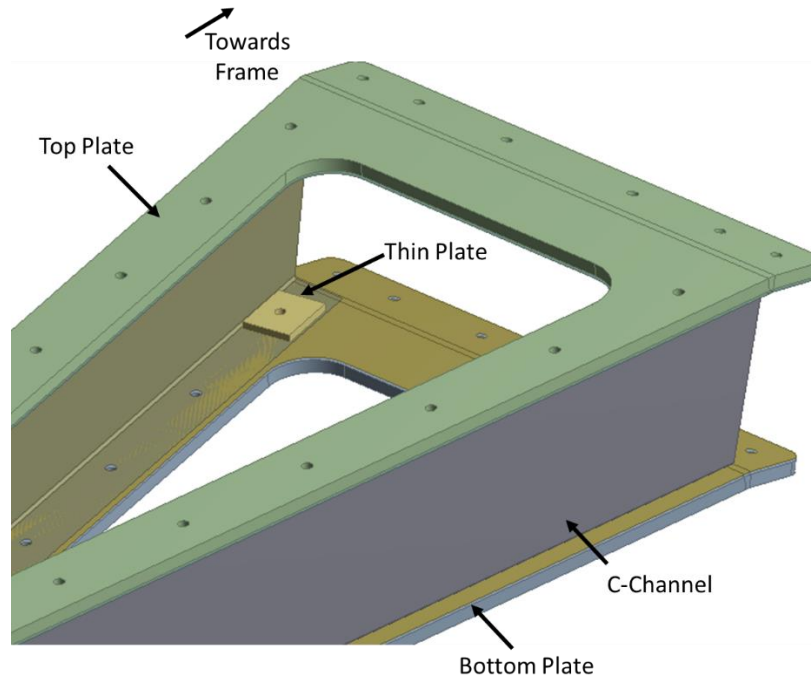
One of two thin plates added to reinforce lower rear bolt-hole.
